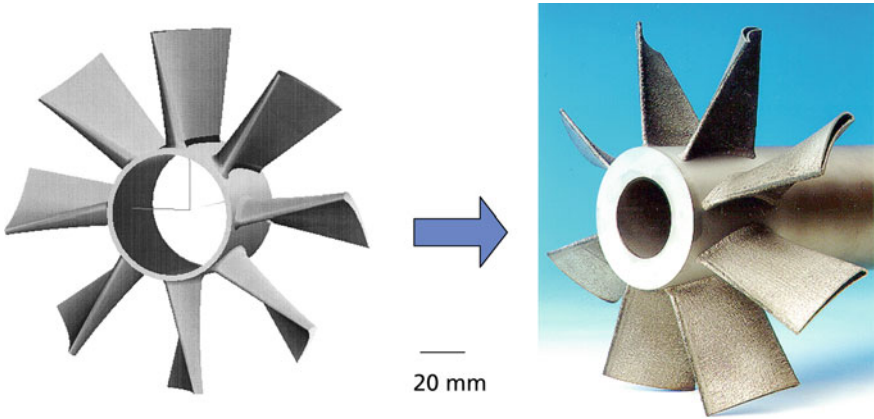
Deposition of blades on a shaft starting from CAD data
